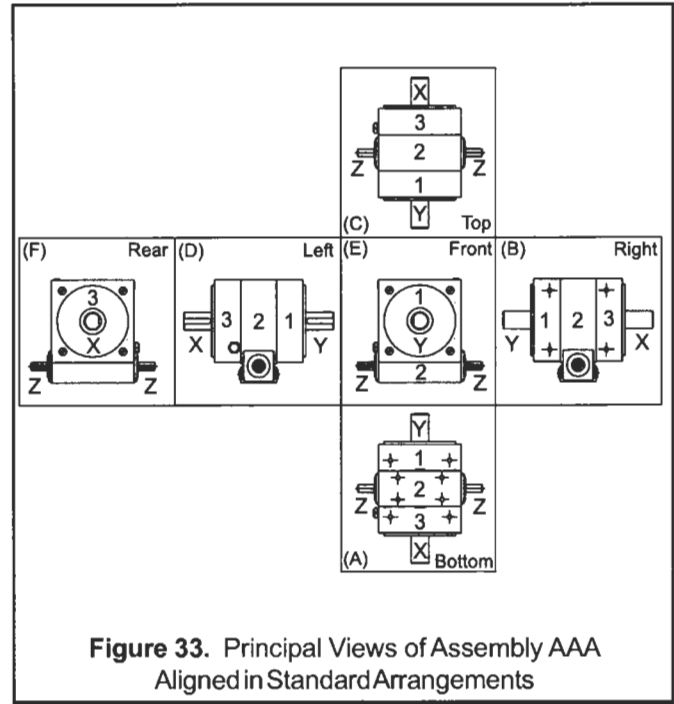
Principal Views of Assembly AAA Aligned in Standard Arrangements
